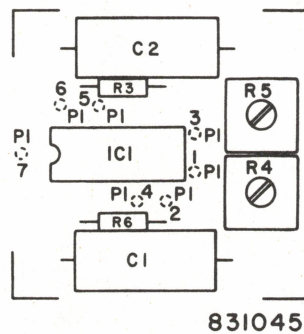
Chopper Board, Parts-Location Diagram (B831045D)
